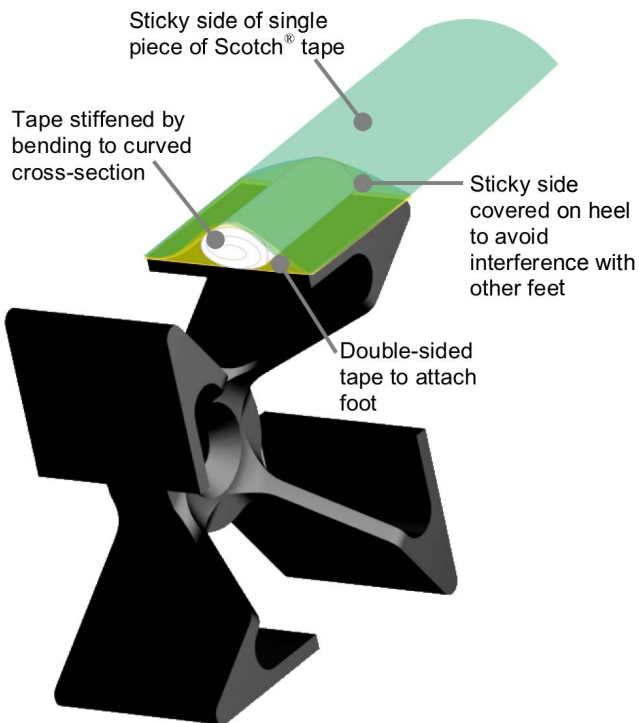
Rendering of a front wheel-leg and tape foot assembly.
